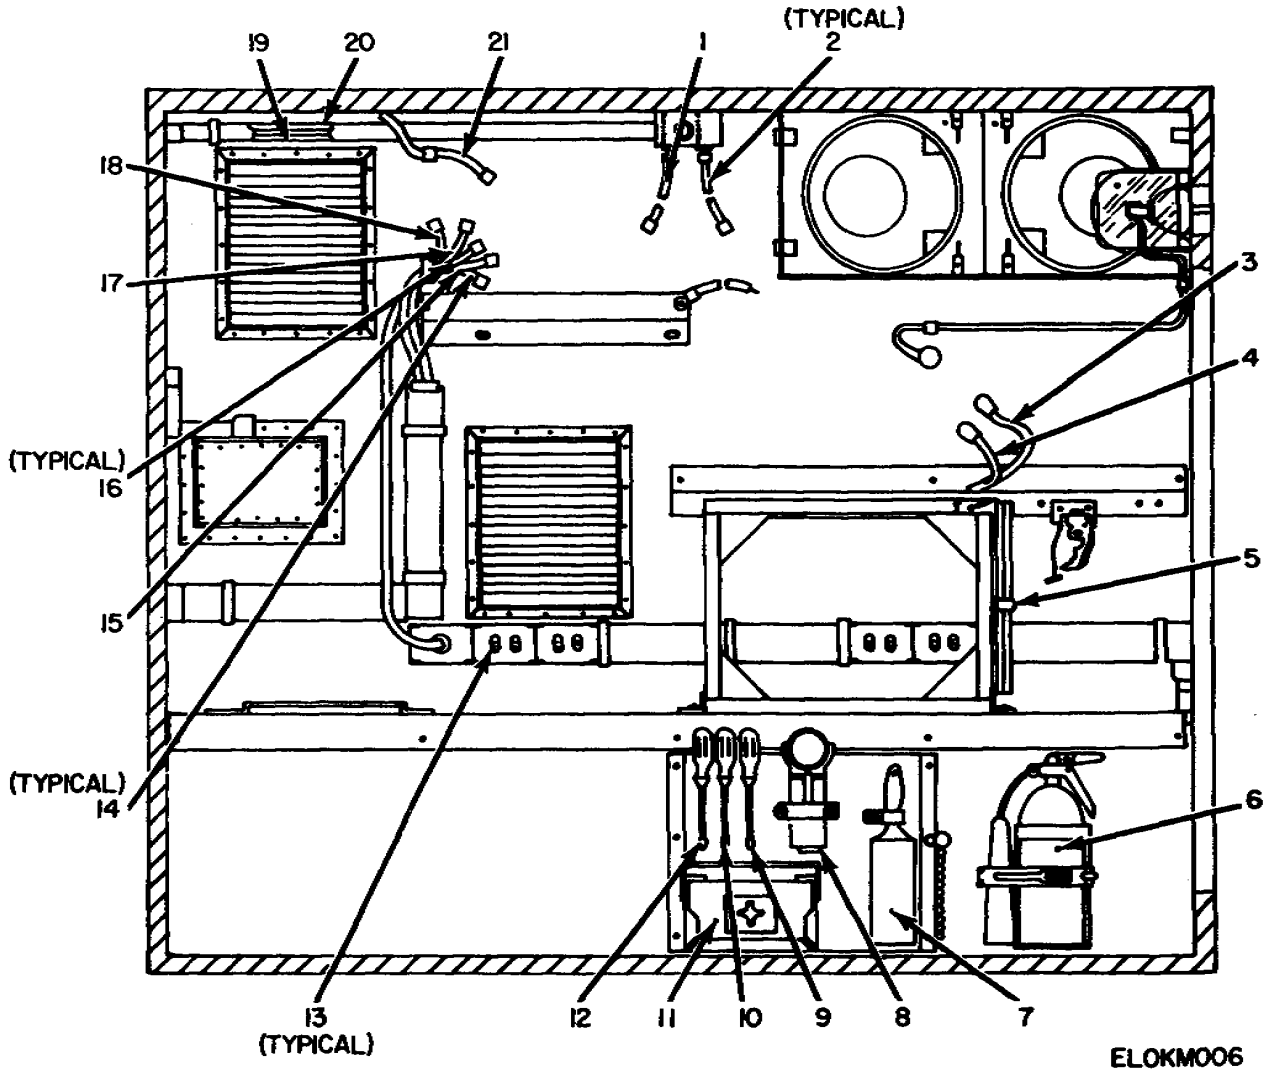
Shelter, Electrical Equipment S-336/TRC-112 Interior, Curbside View.
